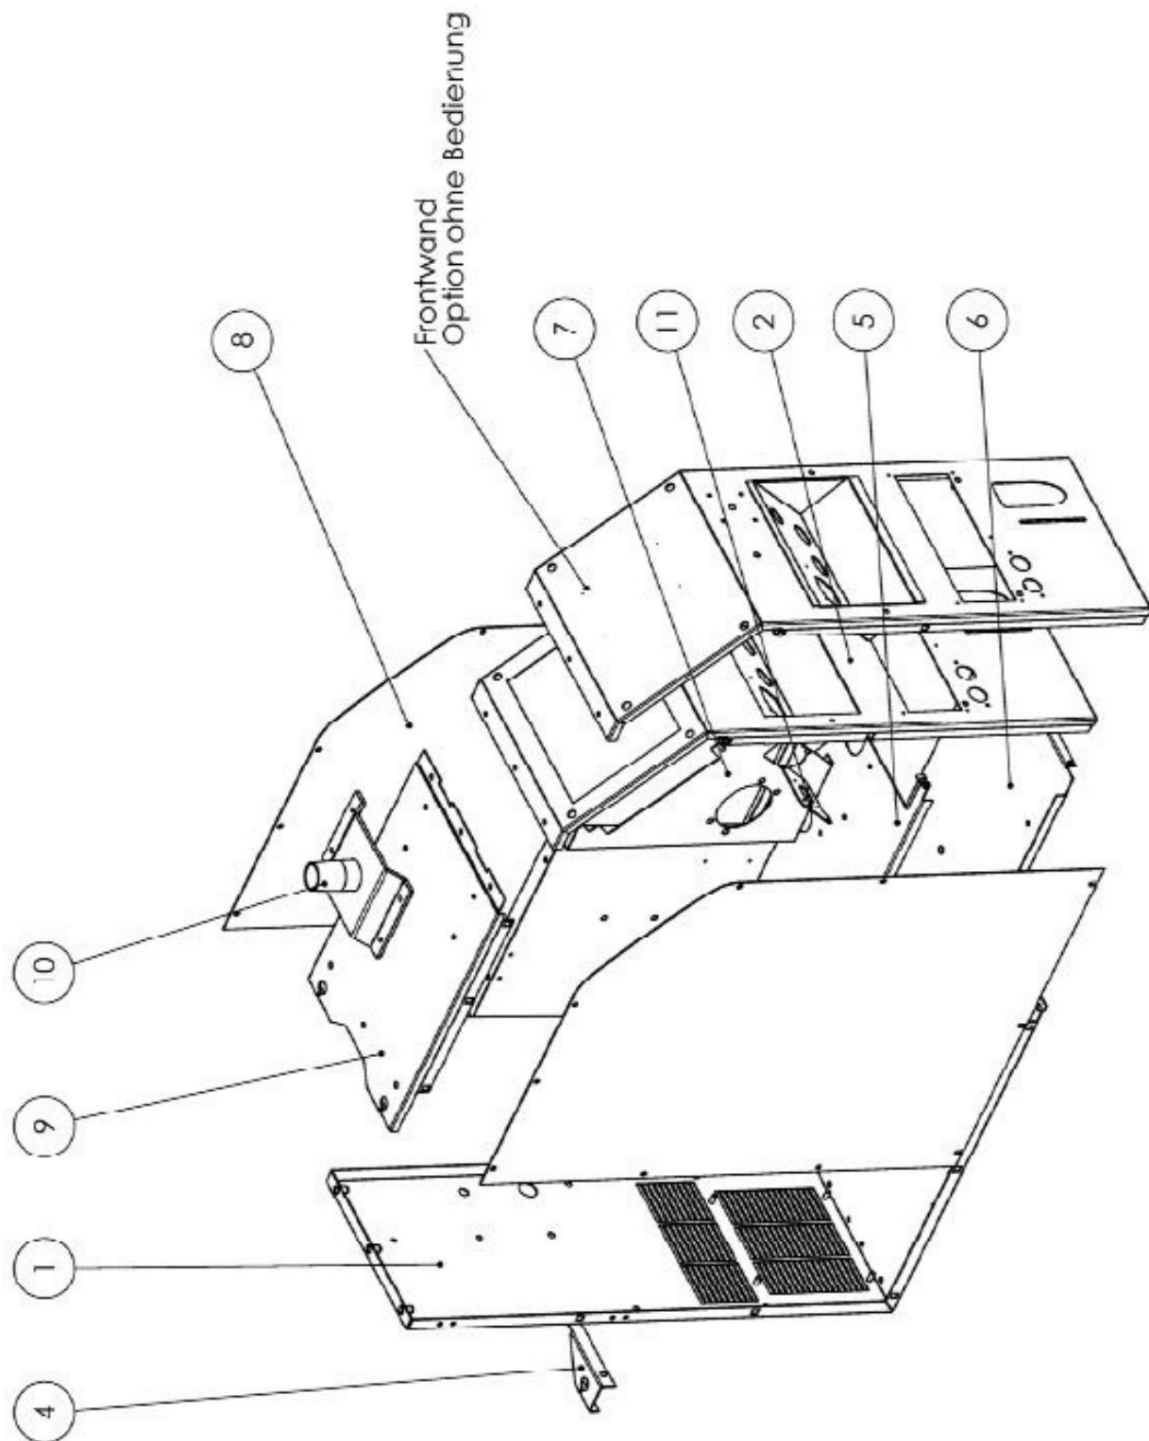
Spare parts drawing 3 - Housing PRO-MIG ARC404WS
